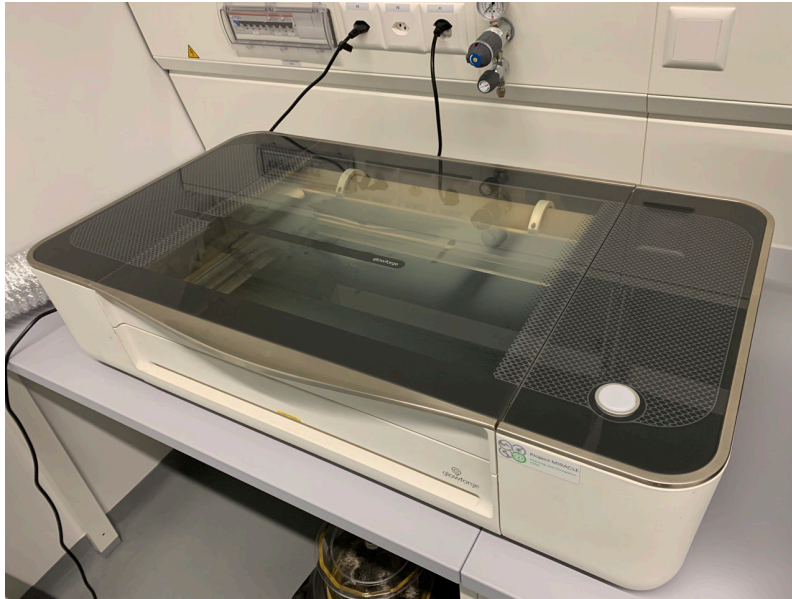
Picture of the laser cutter Glowforge Plus.
